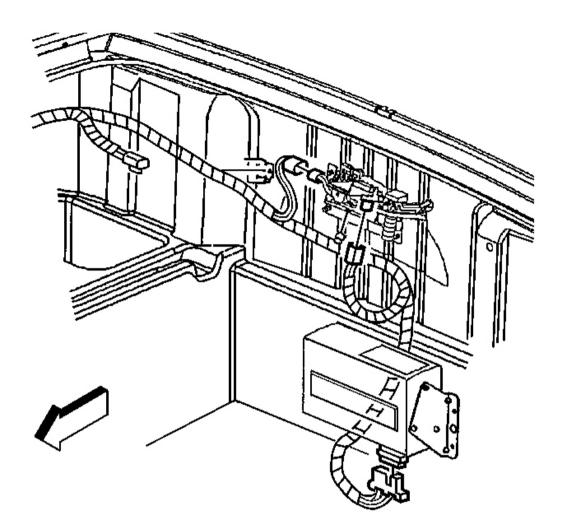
Front Body Wiring Harness Connectors At Decklid Latch And Remote CD Changer Courtesy of GENERAL MOTORS CORP.
